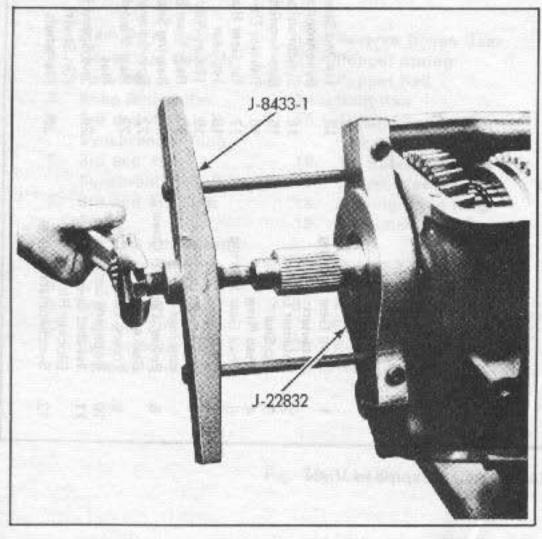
B-4L--Removing Mainshaft Rear Bearing
